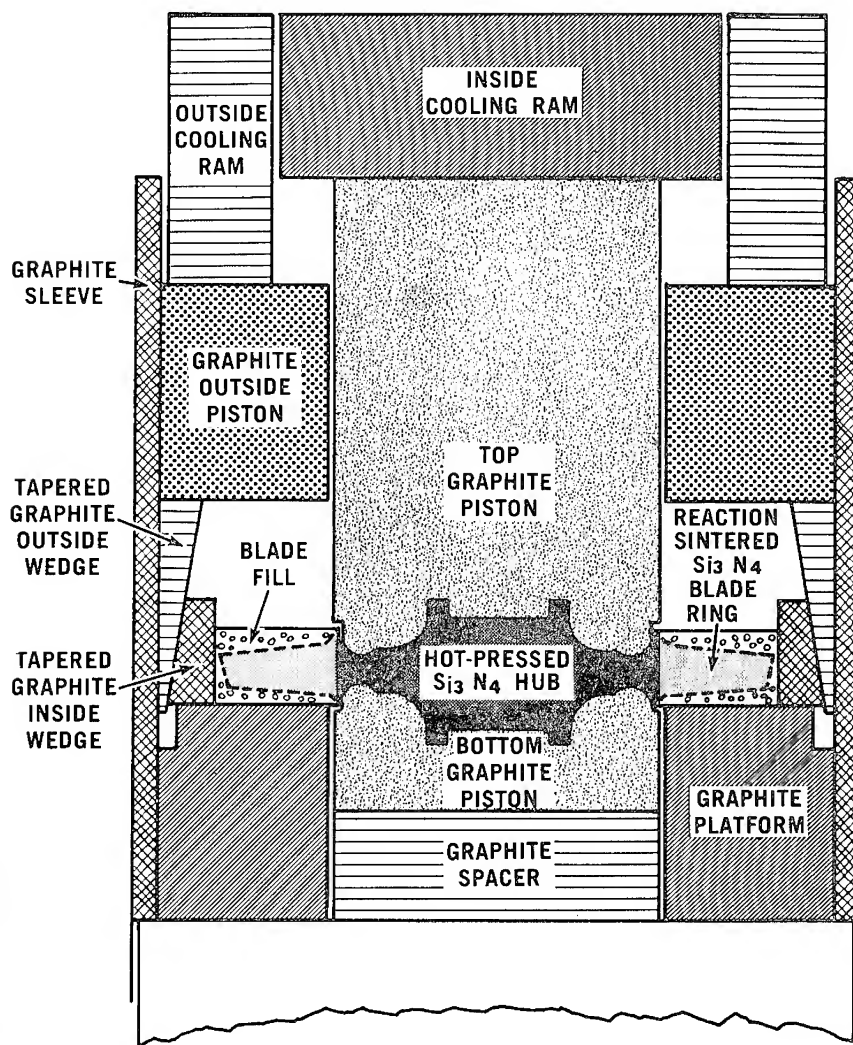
Hot-press bonding assembly for reaction-sintered blade ring and preformed hub.
